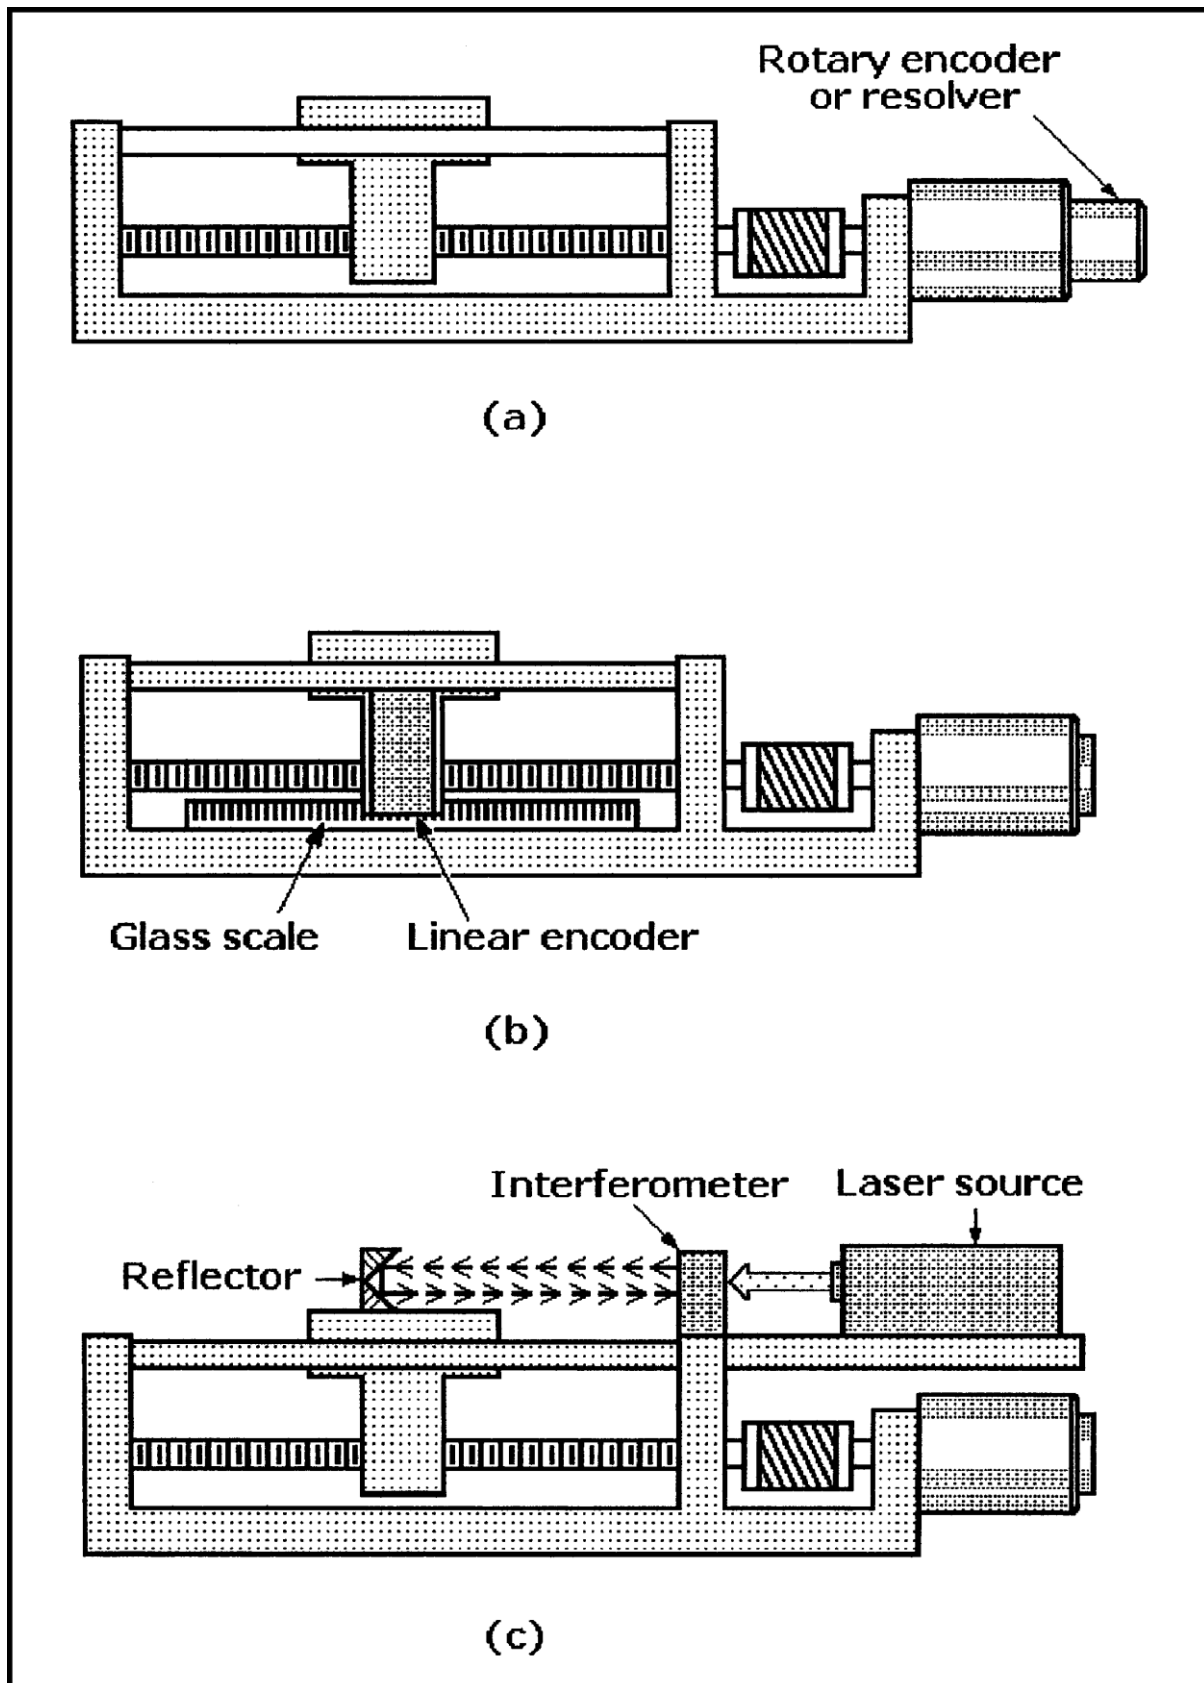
Examples of position feedback sensors installed on a ball screw-driven slide mechanism: (a) rotary encoder, (b) linear encoder, and (c) laser interferometer.
